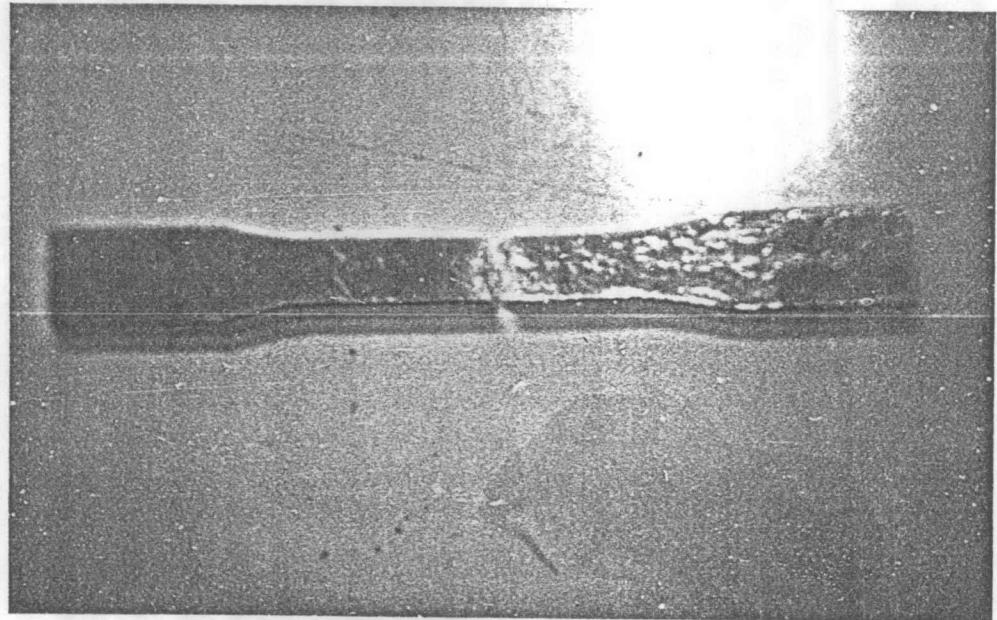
TEST SPECIMEN FOR GRP AFTER TENSILE TEST
